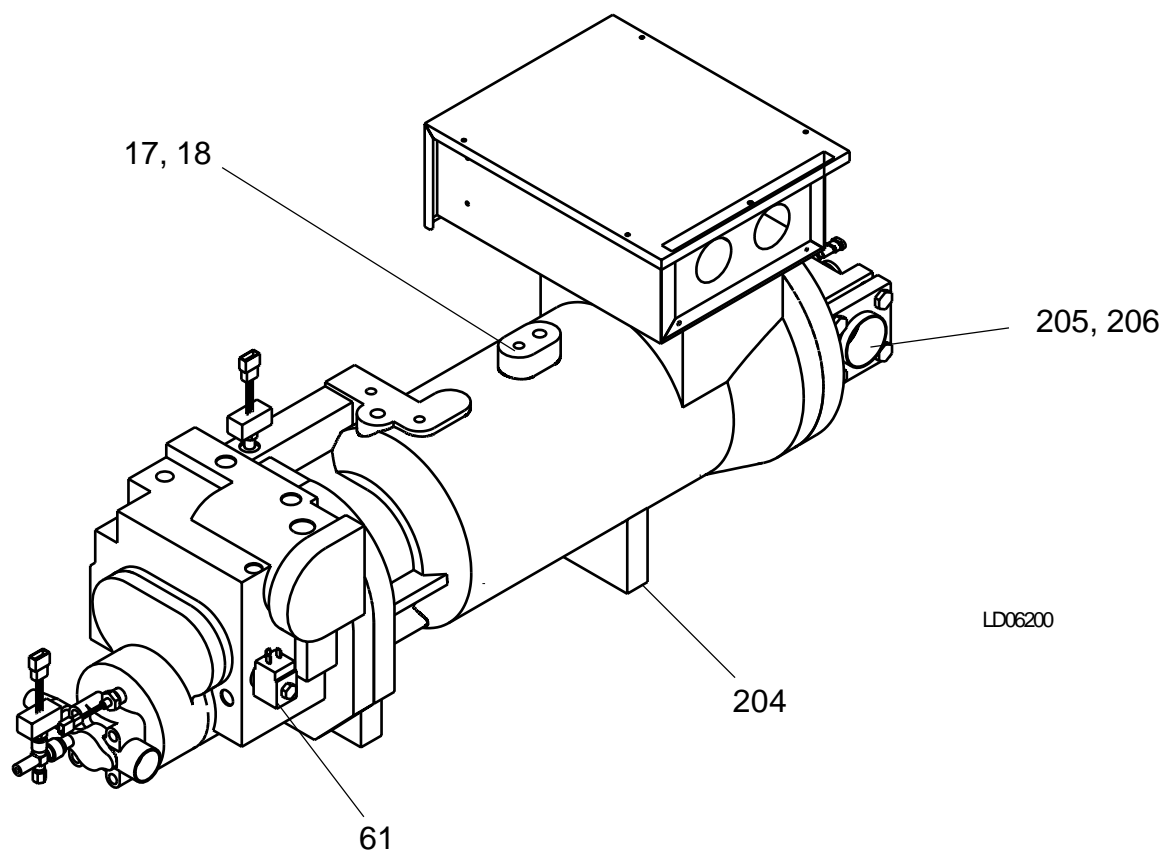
COMPRESSOR AND CONTROL COMPONENTS - 112MM SHOWN (REF. TABLES 13 AND 14)
